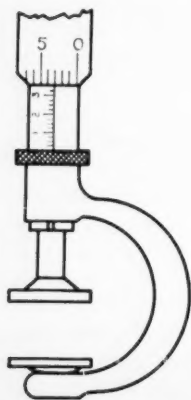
A button micrometer of the type illustrated here is used in taking the measurement of the thickness of the first full tooth.
